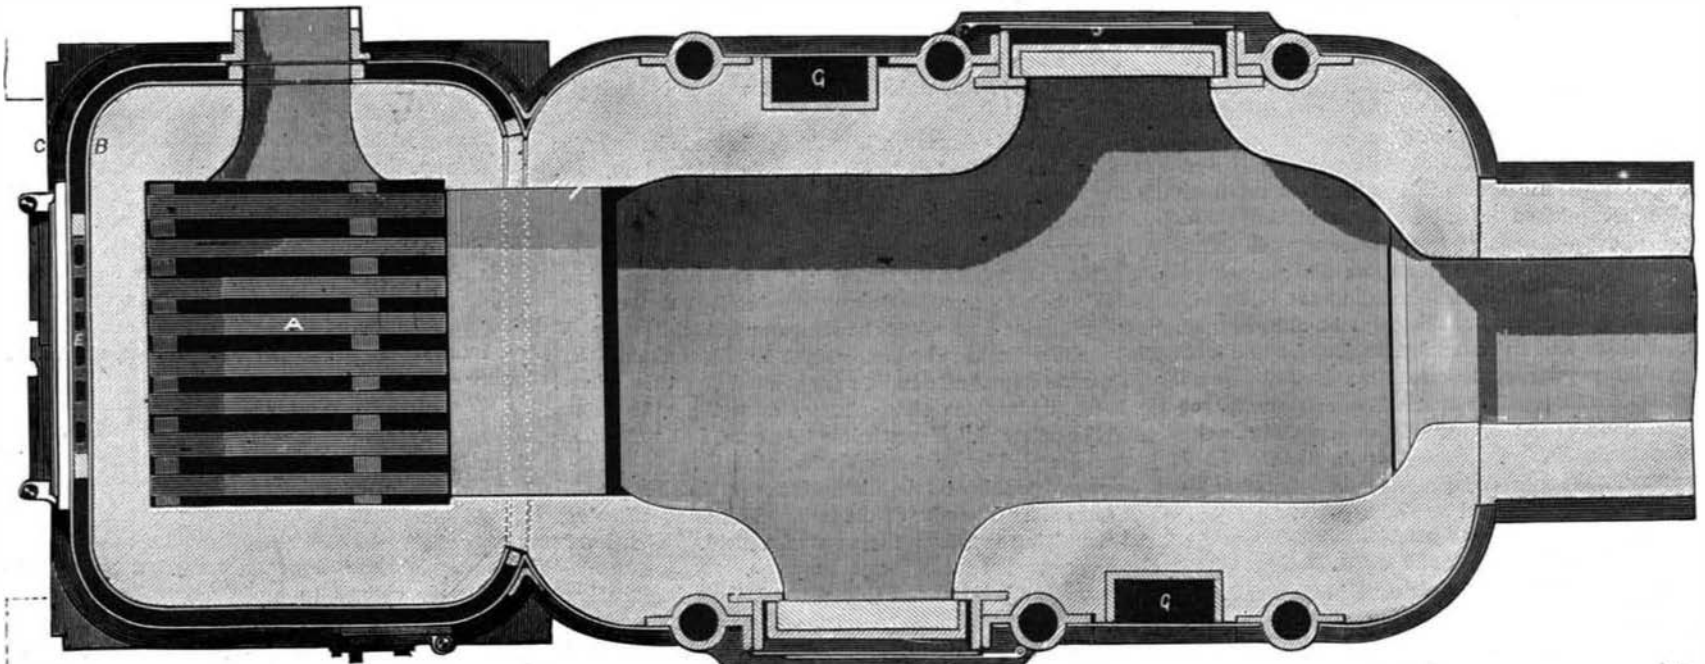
CADDICK AND MAYBERRY PUDDLING FURNACE.—SECTIONAL PLAN.
